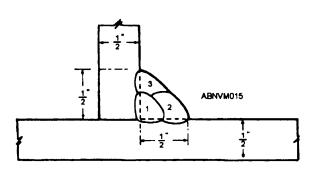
Order of making stringer beads for a T-joint in heavy plate.
